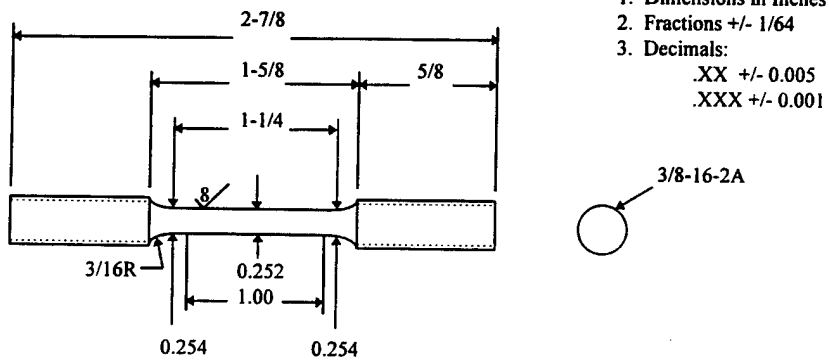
Schematic Illustrating the Dimensions of the Tensile Specimens Tested by ARL-MD.
